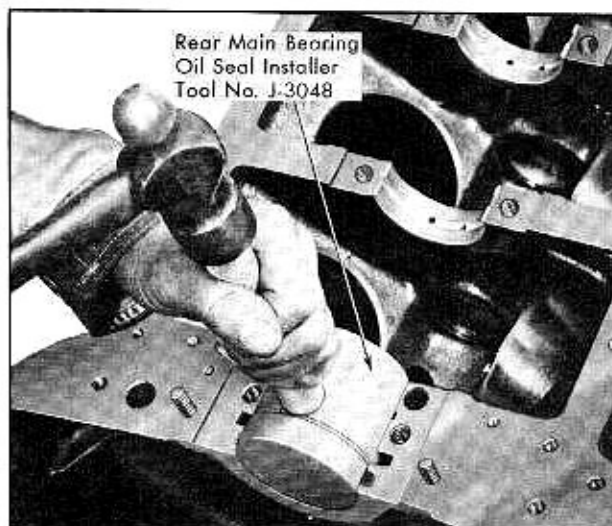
Installing Rear Main Bearing Oil Seal
